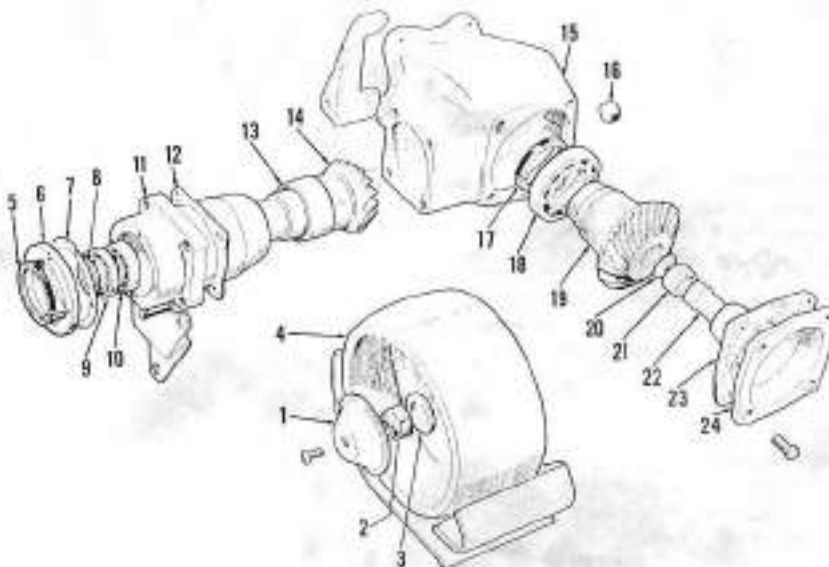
Exploded view of belt pulley assembly available on 865 models. Refer to Fig. 151 for heavy duty unit available for all models.
